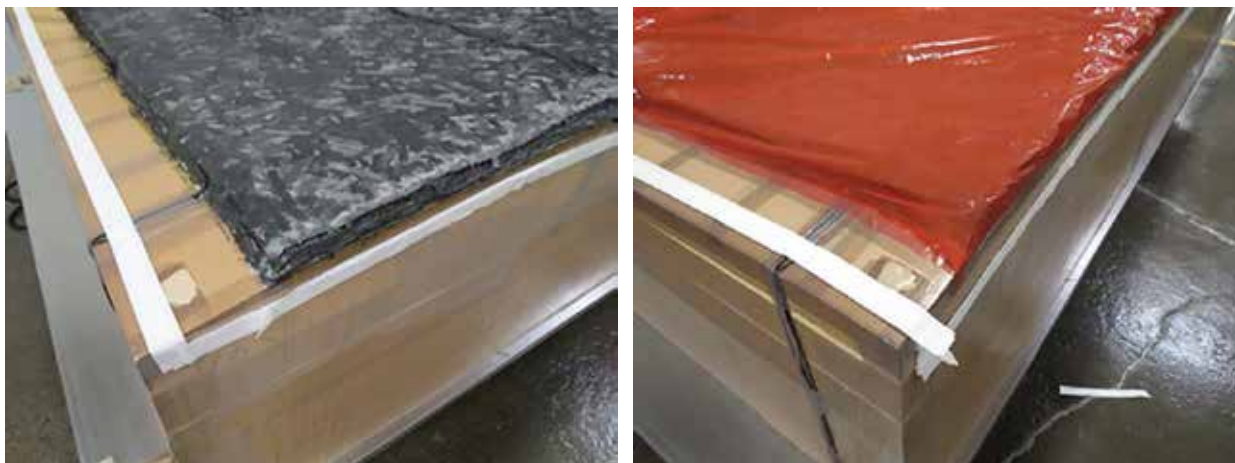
Vacuum sealant tape is placed around the perimeter of the HexTool® tool (left).
